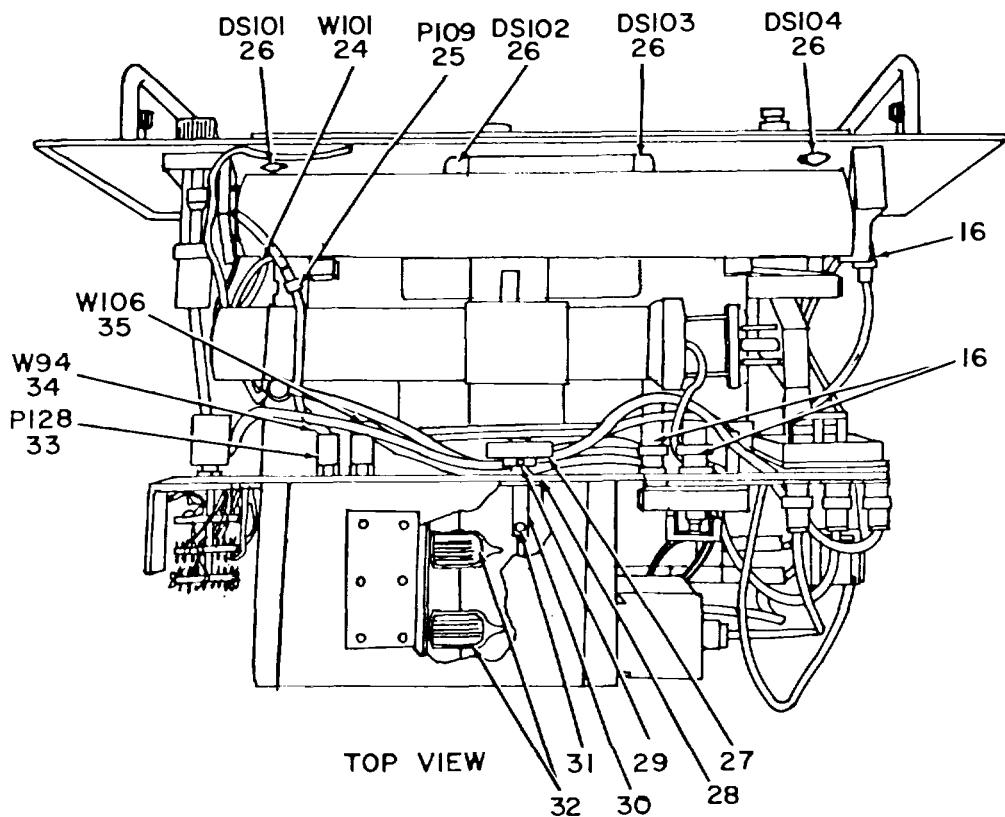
Head Assembly, Tuning (Sheet 2 of 2).
